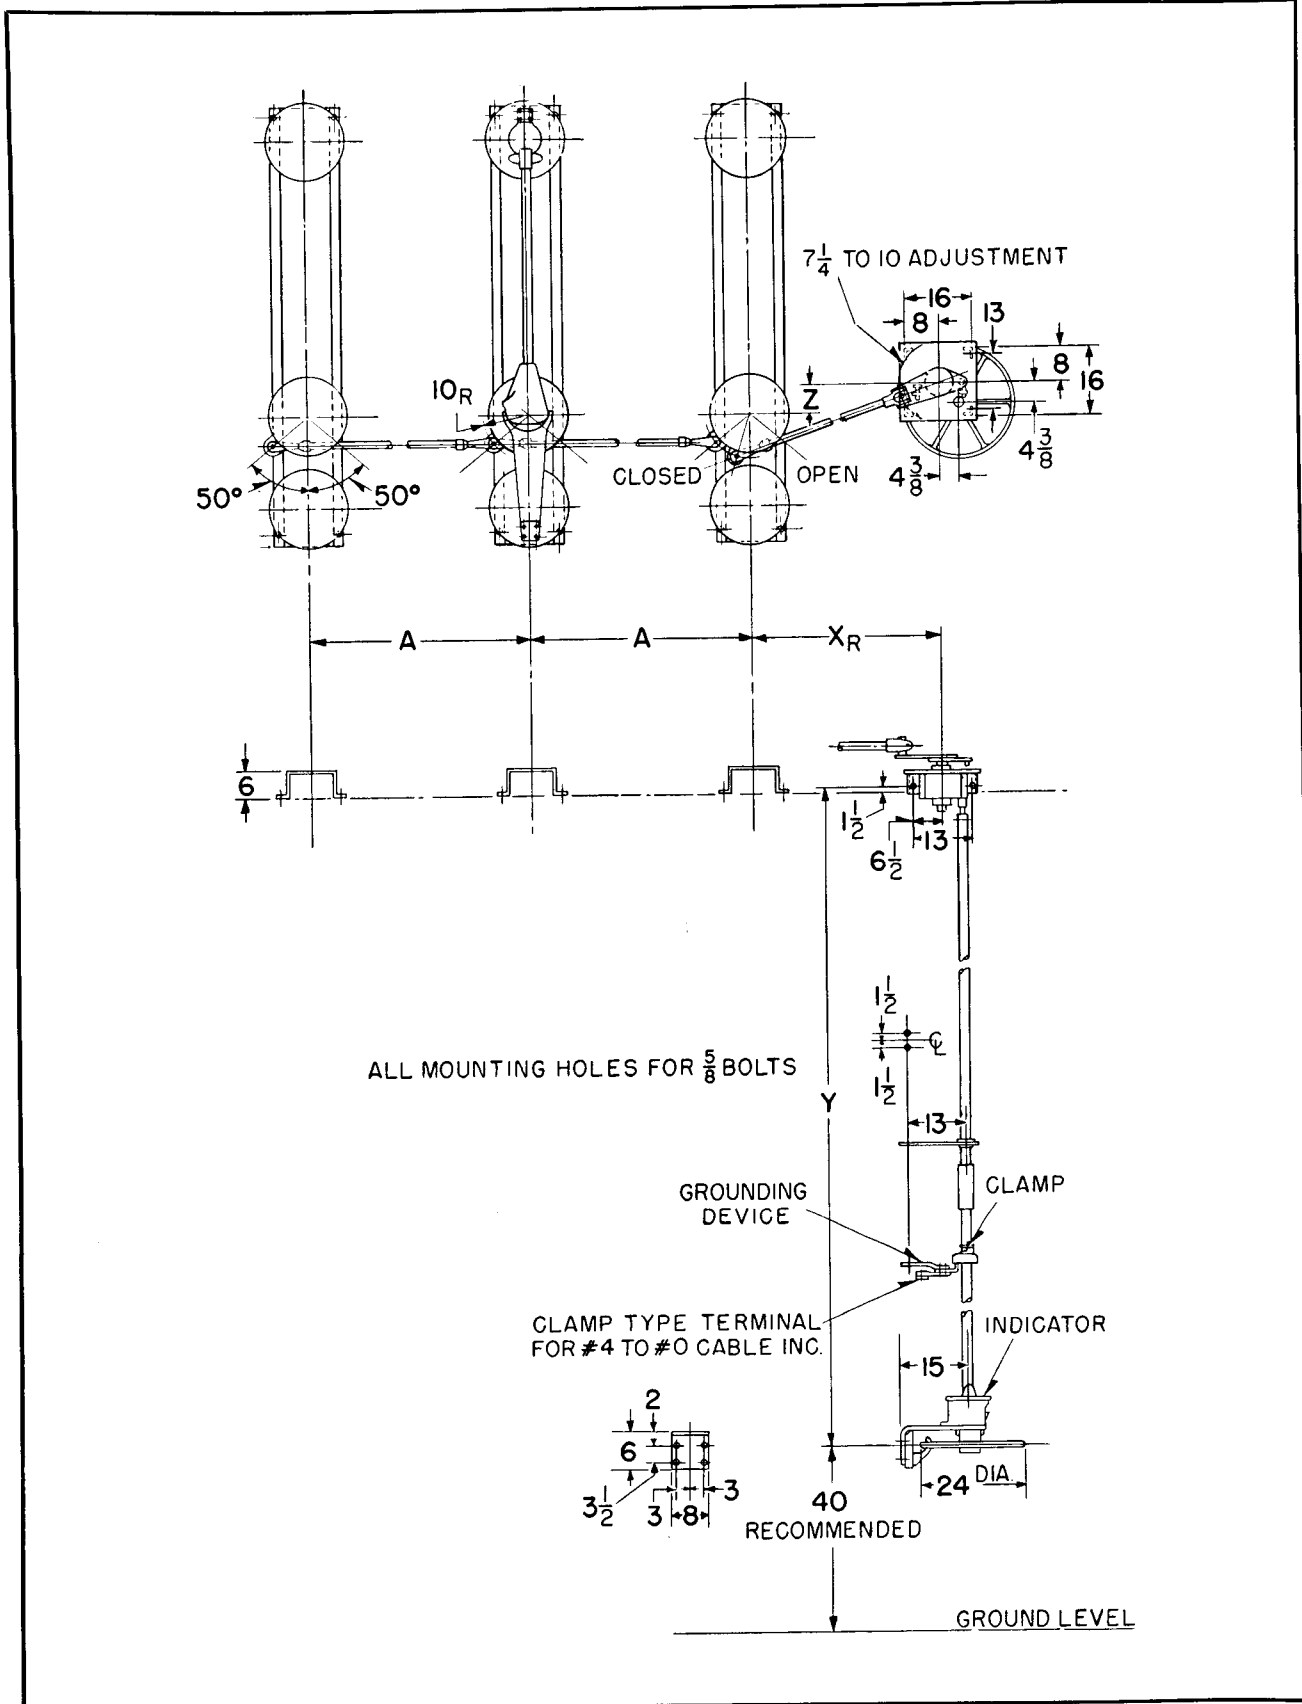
Horizontally Mounted, 196 and 230 kv, 1200A Type V Switch with Gearbox and Handwheel Operating Mechanism
